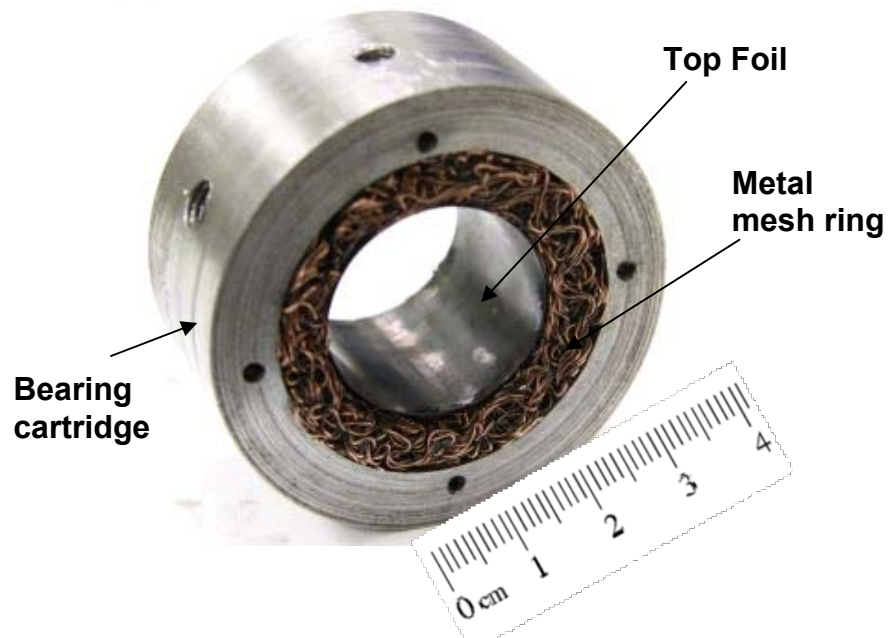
Photograph of a metal mesh foil bearing manufactured at TAMU
